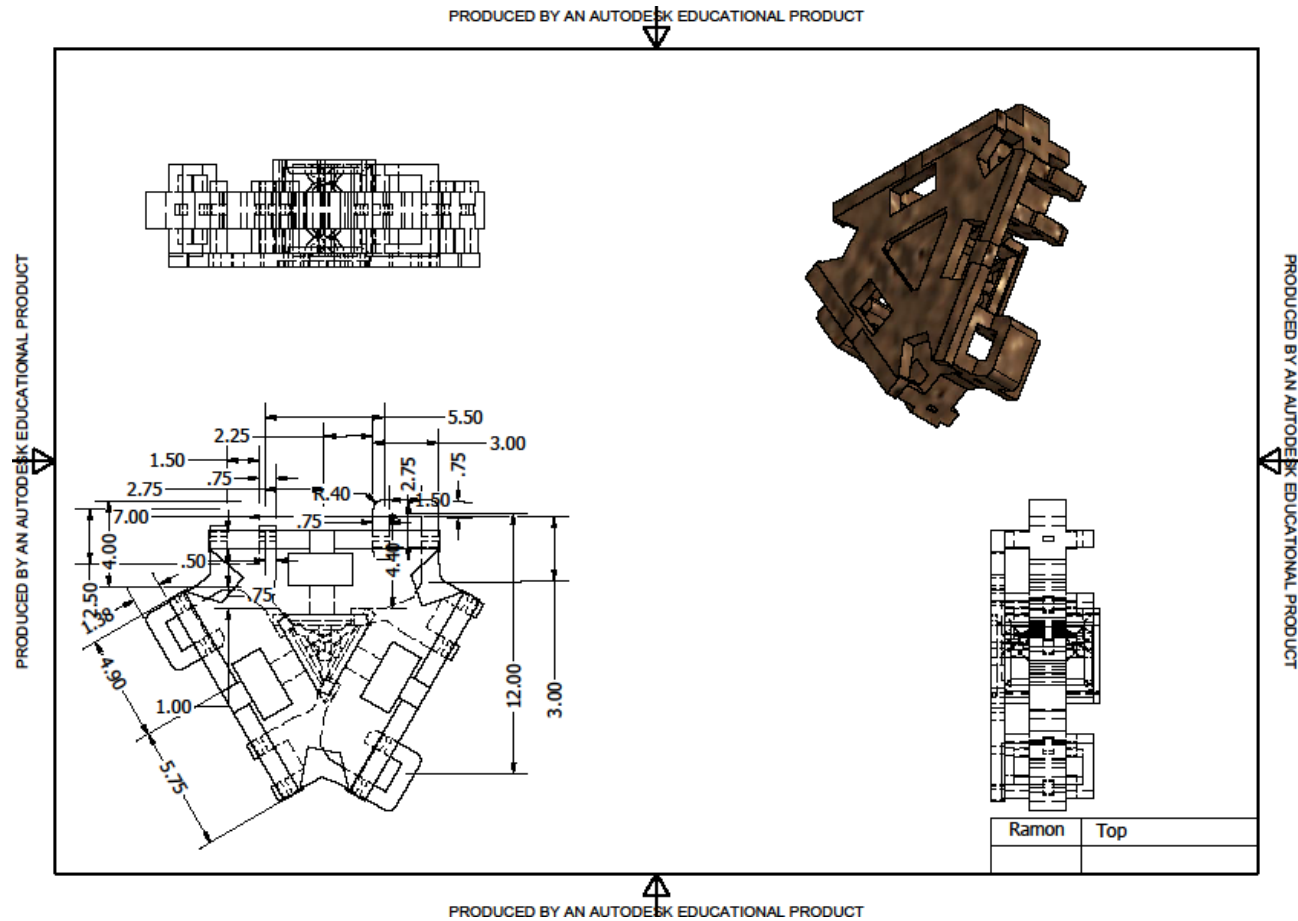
CAD drawing of the Top of the 6-DOF sensor.
